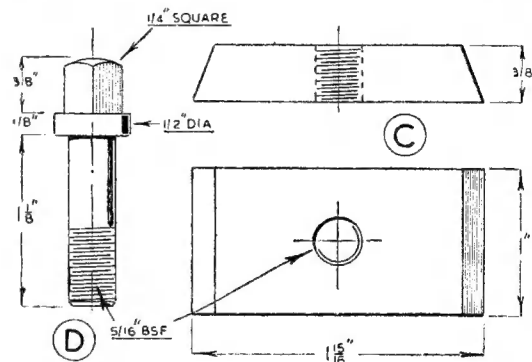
The jaw clamp-plate "C" and its clamp-screw "D"
